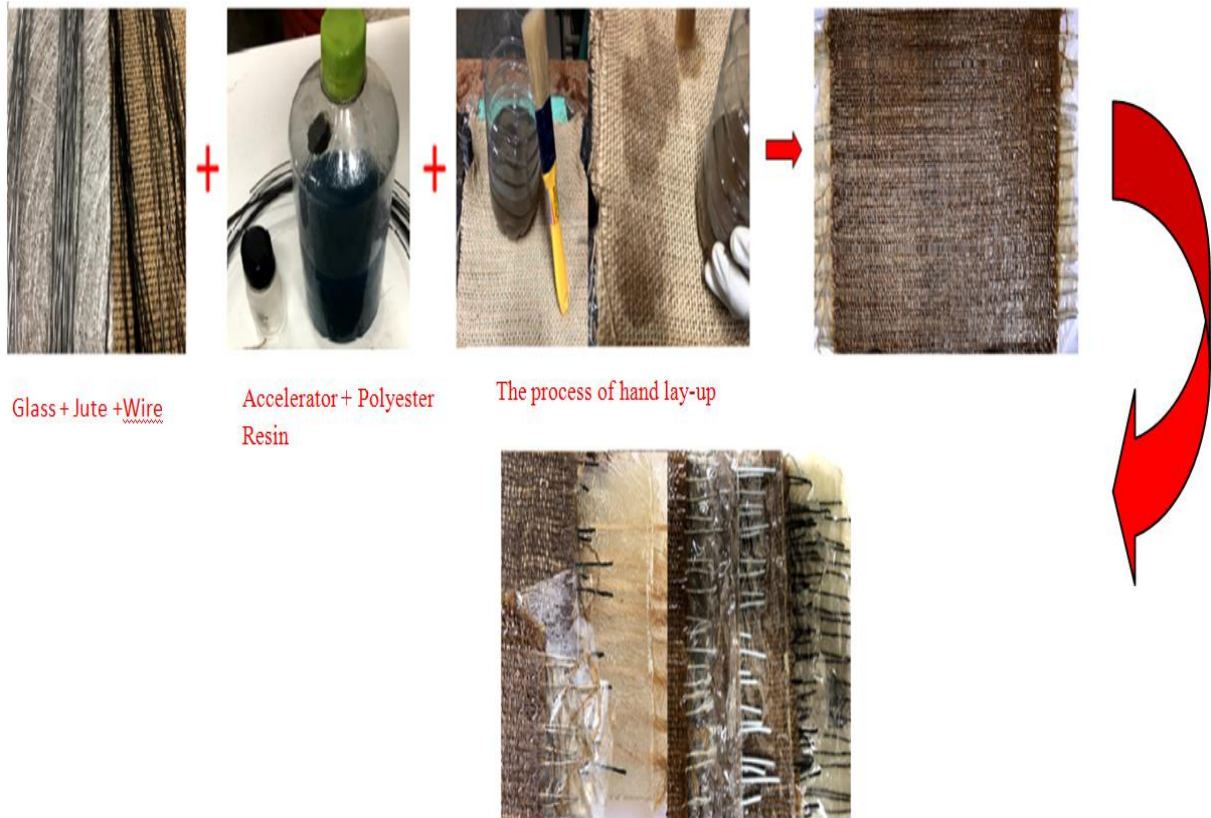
Manufacturing processes of five plates of composite by hand lay-up method.
